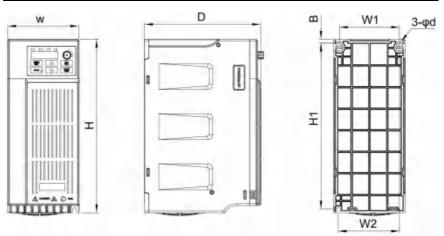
Overall dimensions of FG210-4T(7.5kW~22kW)
